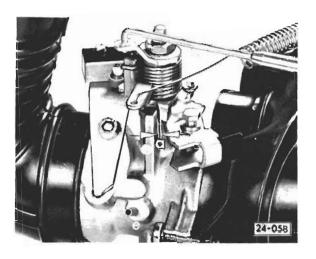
Clearance between throttle valve lever and stop on throttle valve housing. Dimension a should be 1 to 1.5 mm (.040 to .060 in.) with accelerator pedal fully depressed.
